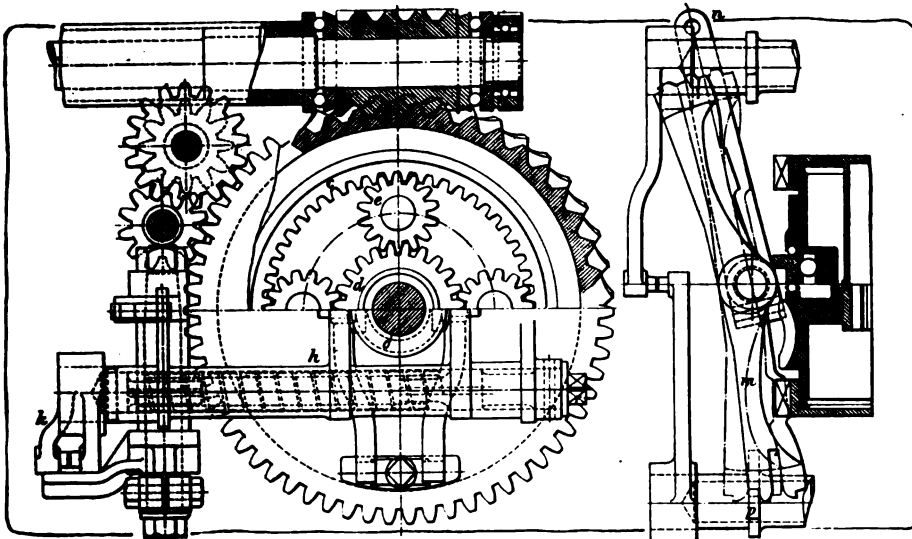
Left side view, partly in section at middle plane of worm. Fig. 4—Top view of pivoted bar in position for blocking sun wheel and interlocked with clutch control at p
